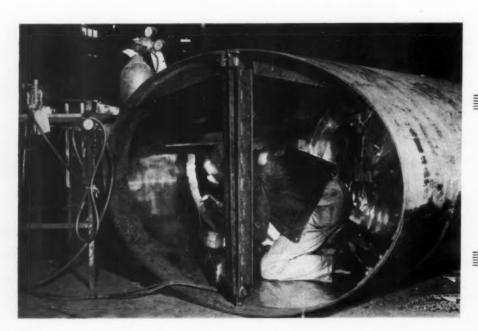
Inert-gas tungsten-arc welding of Type 304 stainlesssteel milk tank
